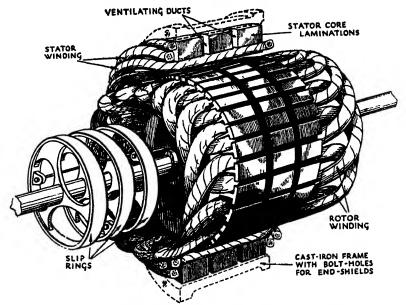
Arrangement of Slip-Ring Induction Motor.
